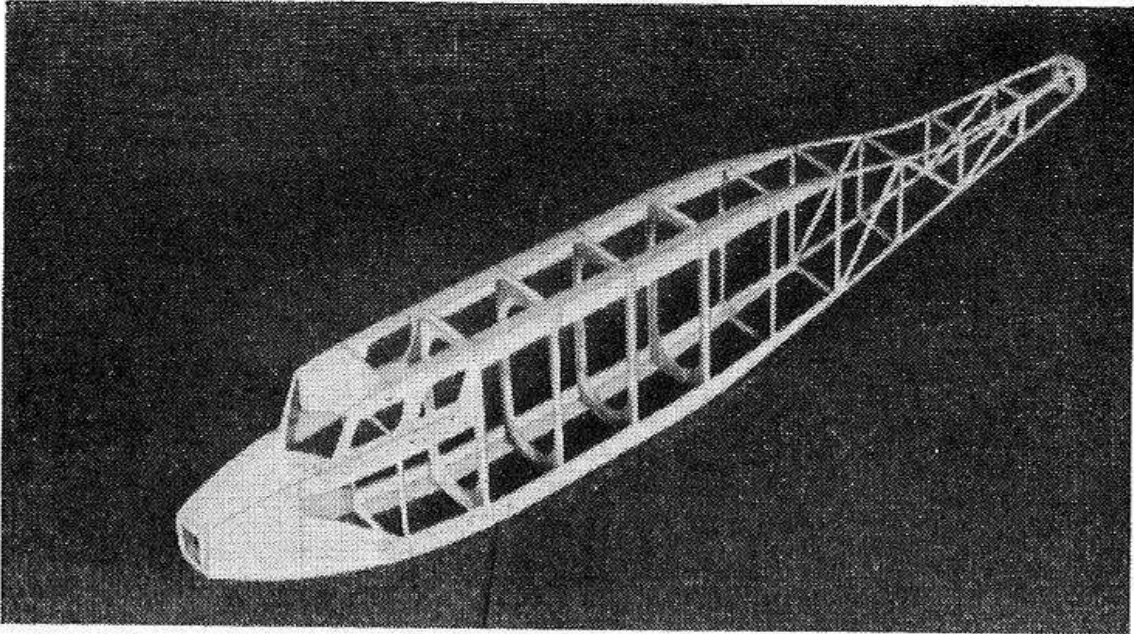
A cabin fuselage embodying both ply-former and strut-former construction. Note balsa sheet reinforcement at nose, and balsa strips cemented to longerons
